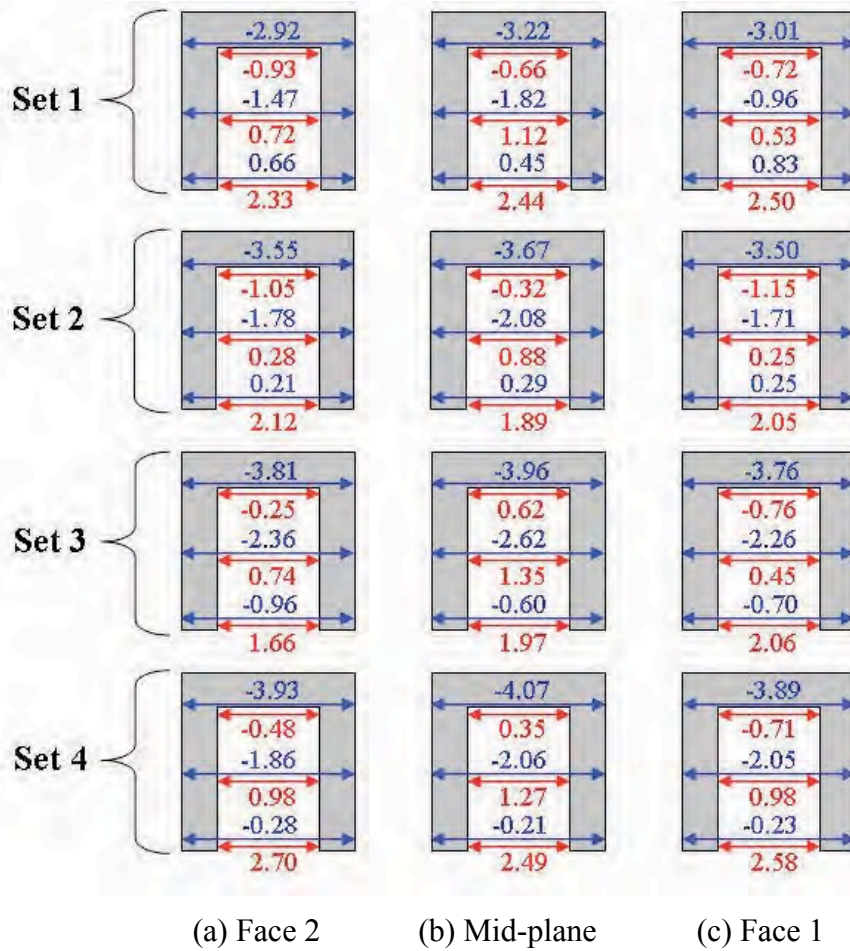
Large bracket dimensional differences from all sets. Dimensional differences were calculated by subtracting initial mold measurements from final casting measurements after shakeout. All units are in mm.
